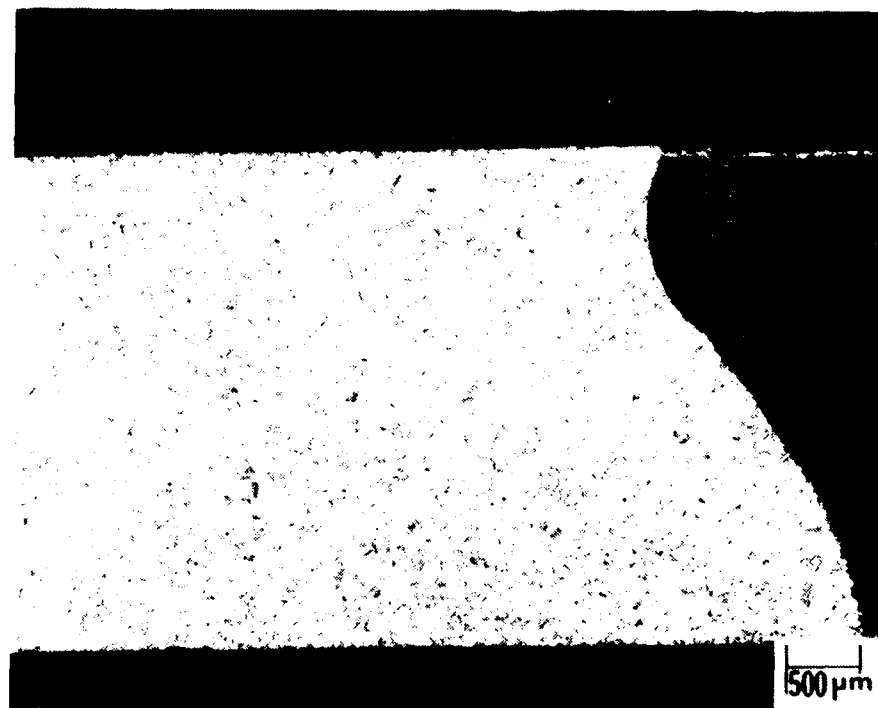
Autogenously welded samples corrosion tested in boiling 60% H_2SO_4 + 8% HCl for 96 hours.
